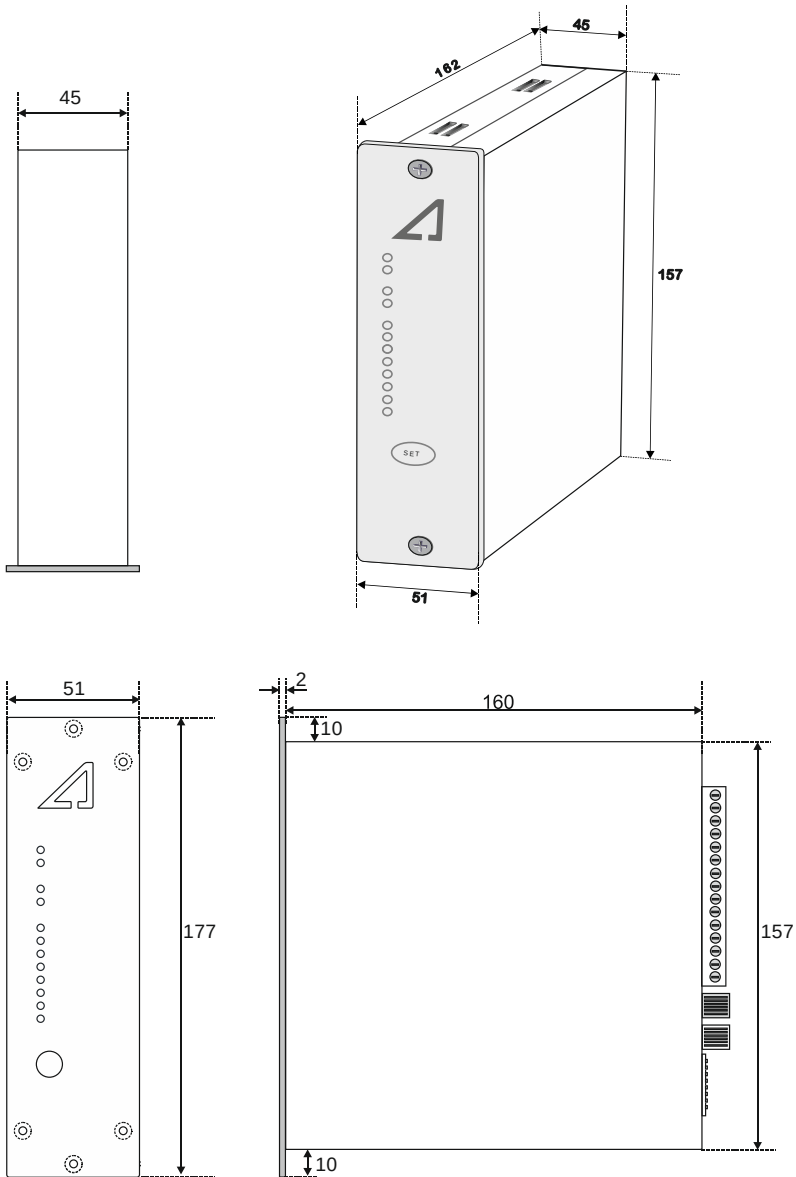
AQ101 device dimensions, all dimensions in millimeters.
